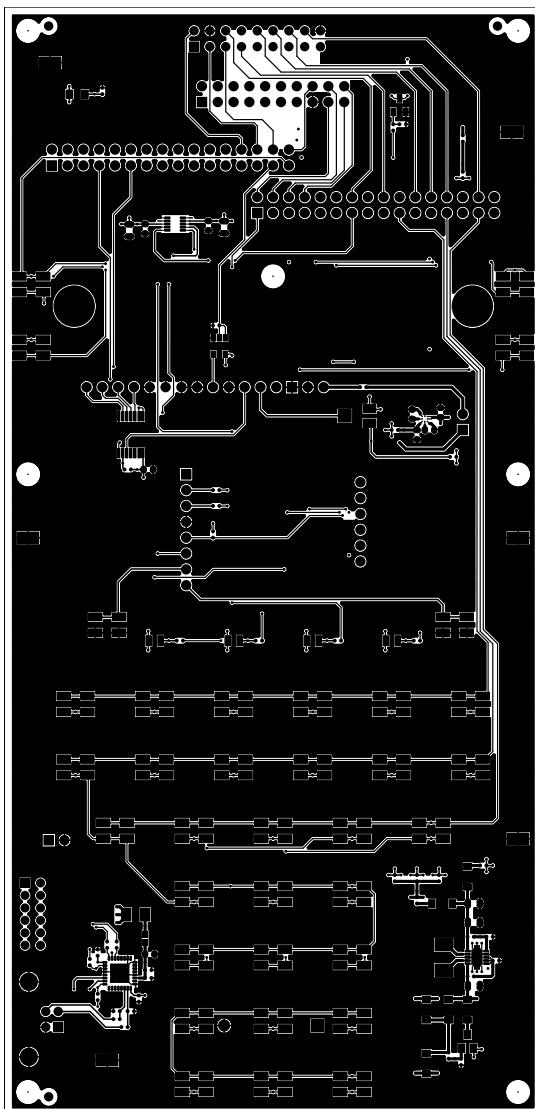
1323x-RCM PCB Layout (Top View)
